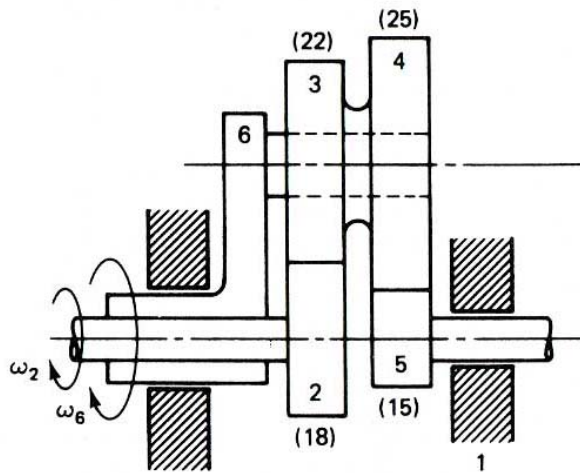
Compound planetary gear train with two inputs and one output (see Examples 7.3 and 7.6). See Fig. 7.36 for an end view sketch of this gear train.
